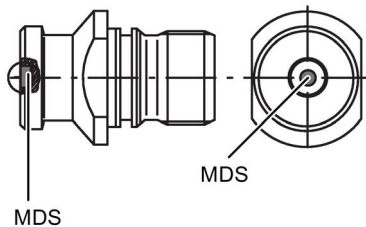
Installation example of MDS D421/D521/E623 in a stud bolt
